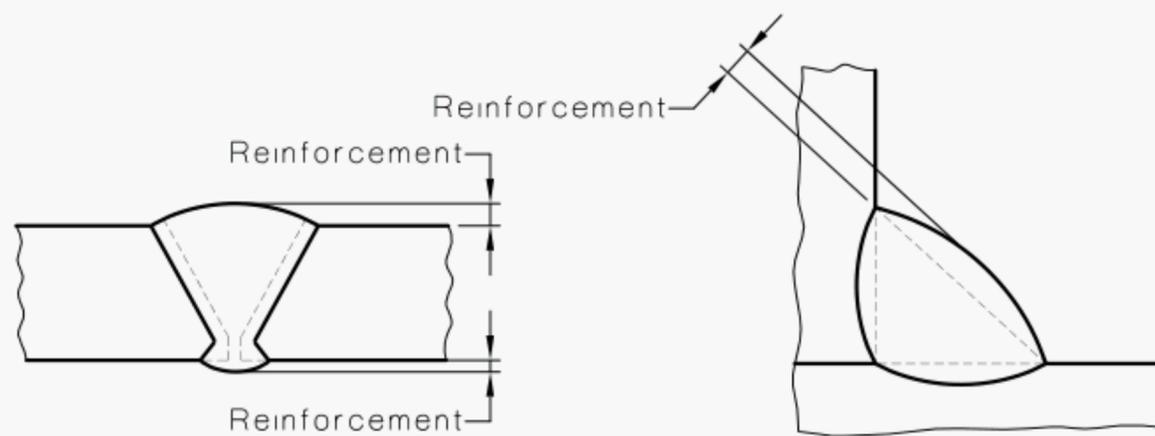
EXAMPLES OF REINFORCEMENT
